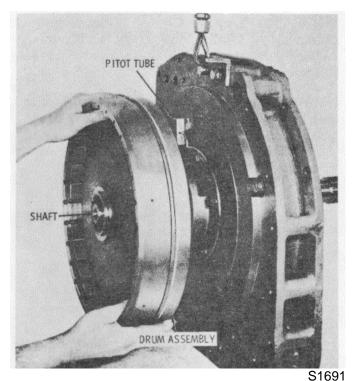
Installing Splitter-Direct Clutch and Drum Assembly
